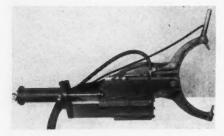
Progressive Welding Gun Attachment Actuated by an Air-Cylinder. Welding is Direct, the Gun is Hydraulically Operated
